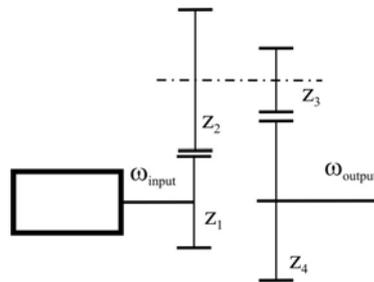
Kinematical schema of gear with toothed wheels z_1, z_2, z_3, z_4 number of teeth of gear wheels.
